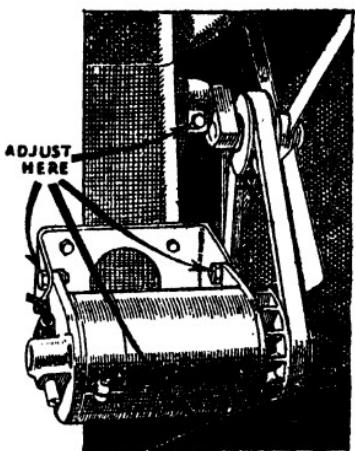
GENERATOR DRIVE-BELT ADJUSTMENT POINTS.
